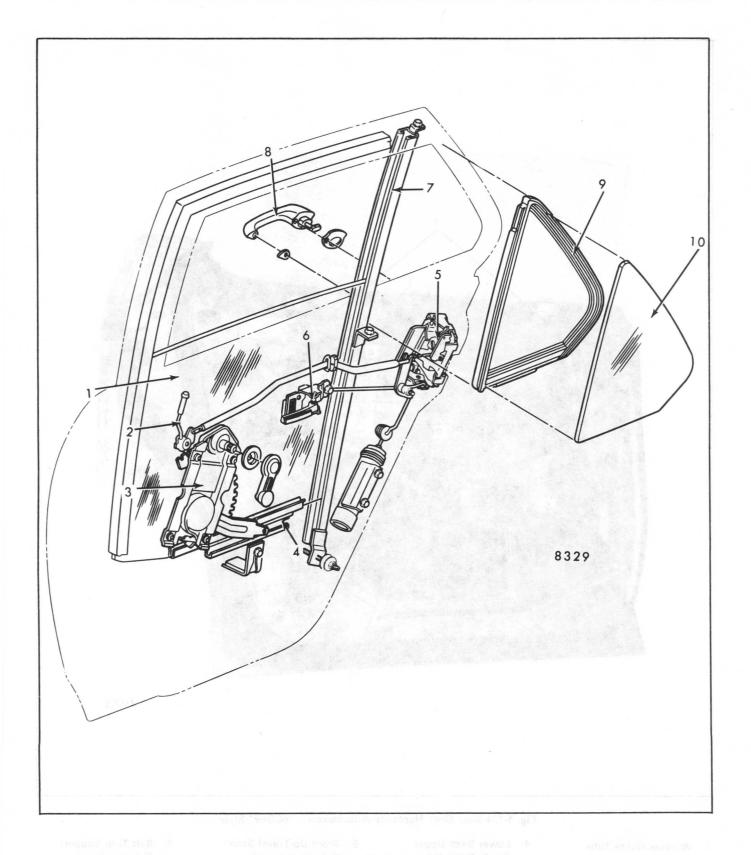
Rear Door Hardware - "X-69" Styles
